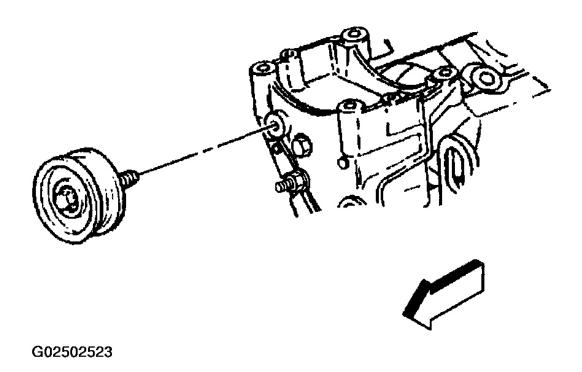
Installing Drive Belt Idler Pulley - Without Air Conditioning Courtesy of GENERAL MOTORS CORP.
